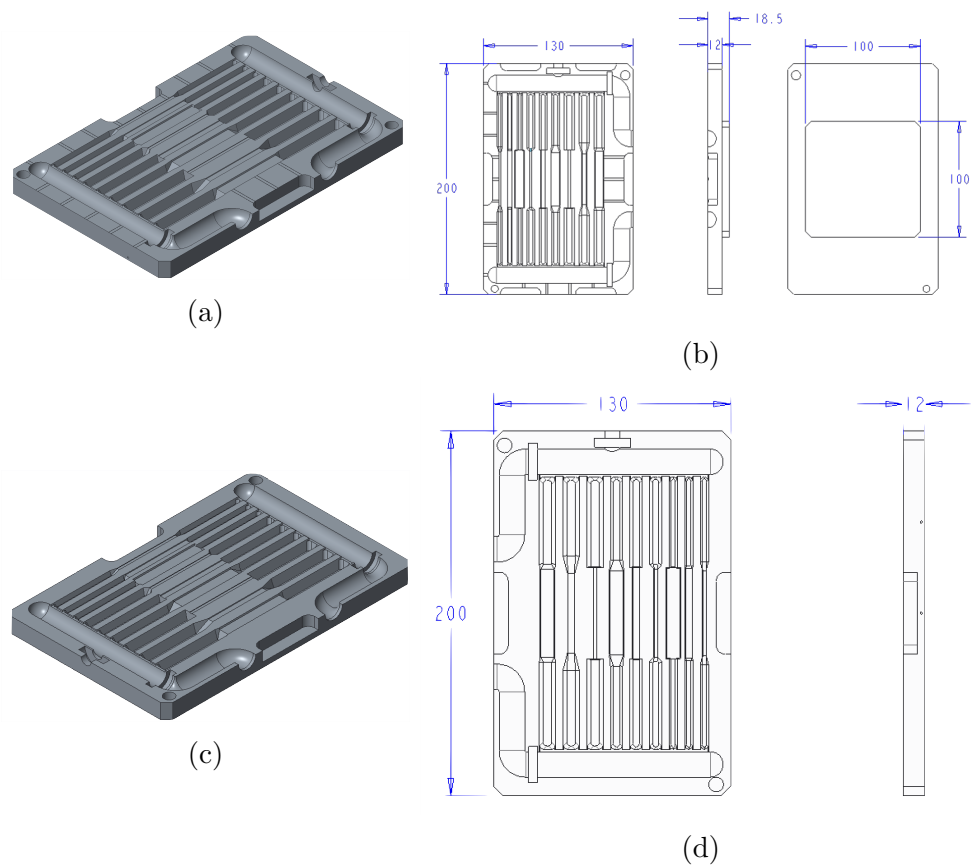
Mould inserts for injection moulding experiments. (a) Bottom plate, isometric view. (b) Bottom plate, main dimensions. (c) Top plate, isometric (d) Top plate, main dimensions.
